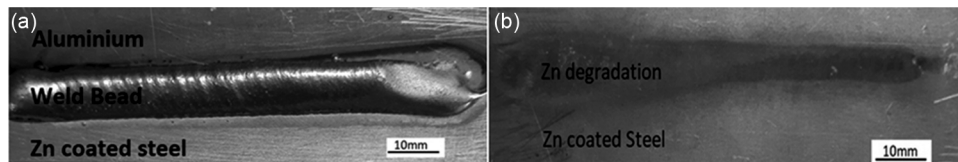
(a) Front view of weld sample, and (b) Back view of weld sample.
